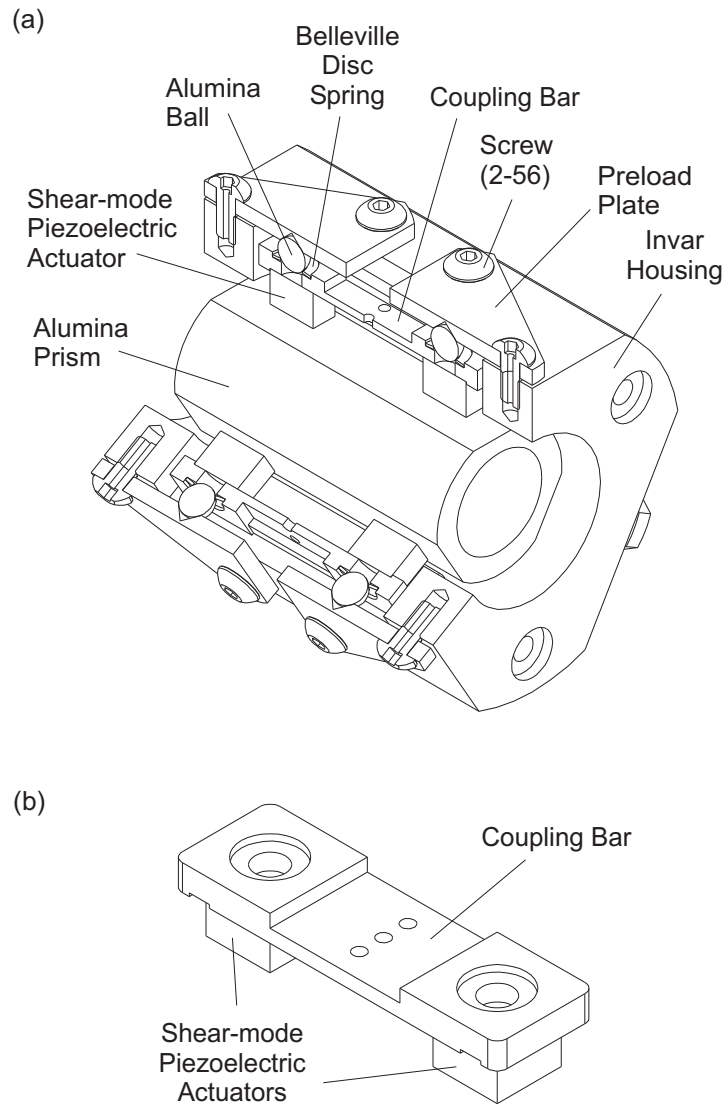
(a) Section cut-away view of piezoelectric linear motor and (b) driving mechanism.
